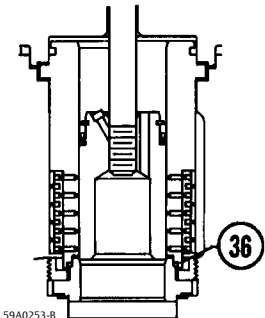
DETAIL OF LEVEL A, B, OR C WHISPER TRIM III CAGE AND VALVE PLUG WITH DIVERTER CONE, FOR NPS 8 VALVE ONLY
